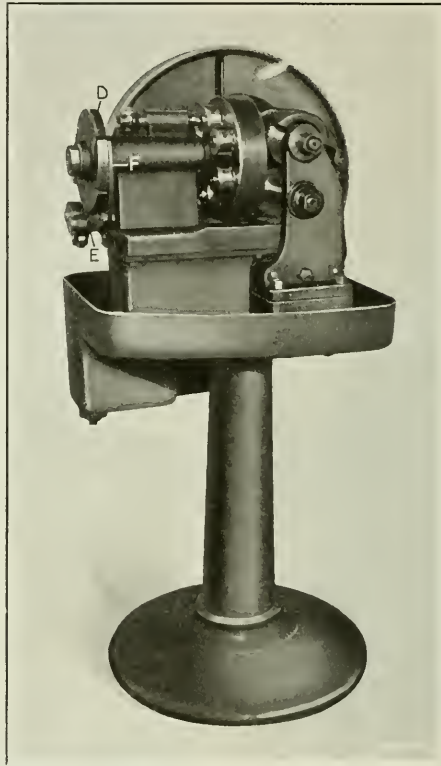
Nut Castellating and "Hexing" Machine brought out by the Manufacturers' Consulting Engineers
